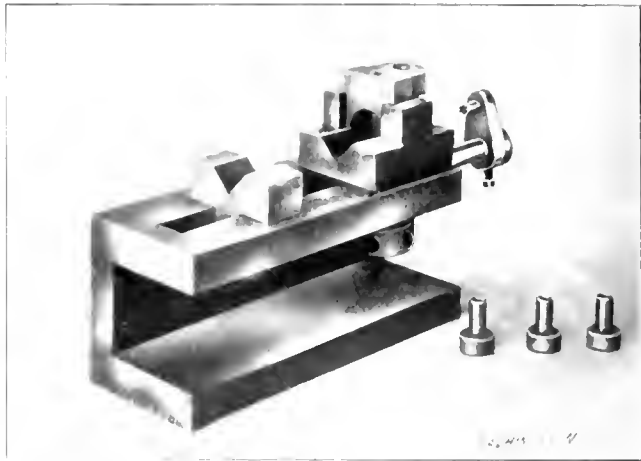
Jig for Holding Round Bar Stock while drilling Cross-hole.
